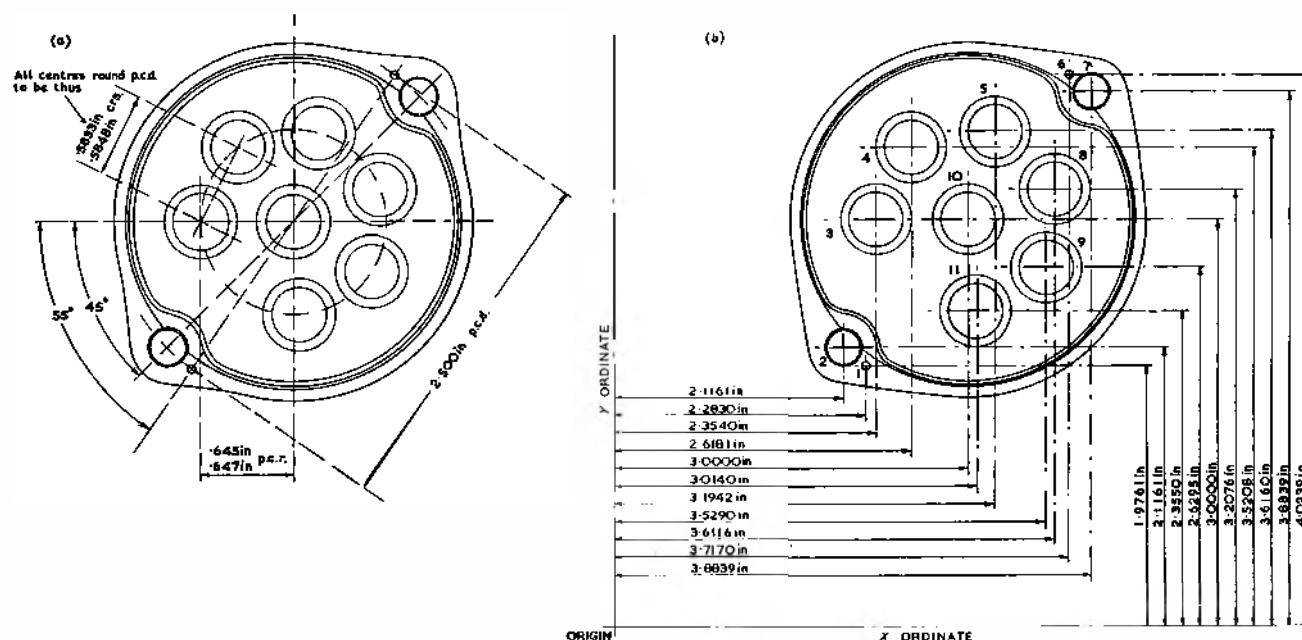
(a). Actuator gearbox (b). Actuator gearbox—co-ordinate presentation
